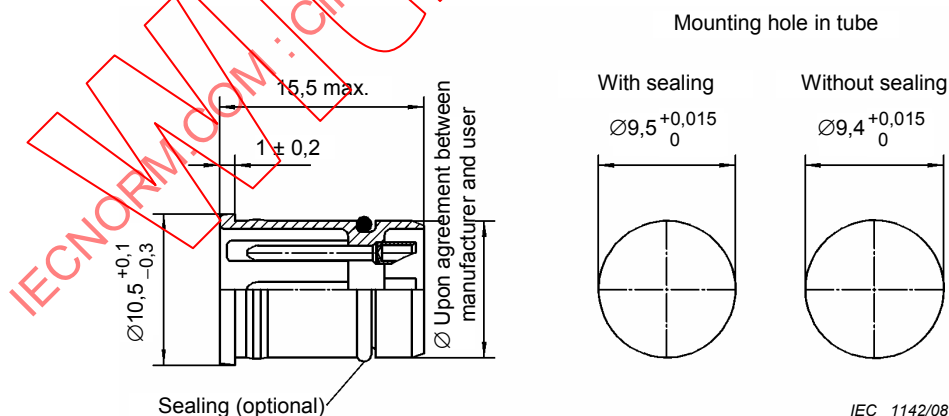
Tube insert, male contacts, mounting without thread (thread on tube)
